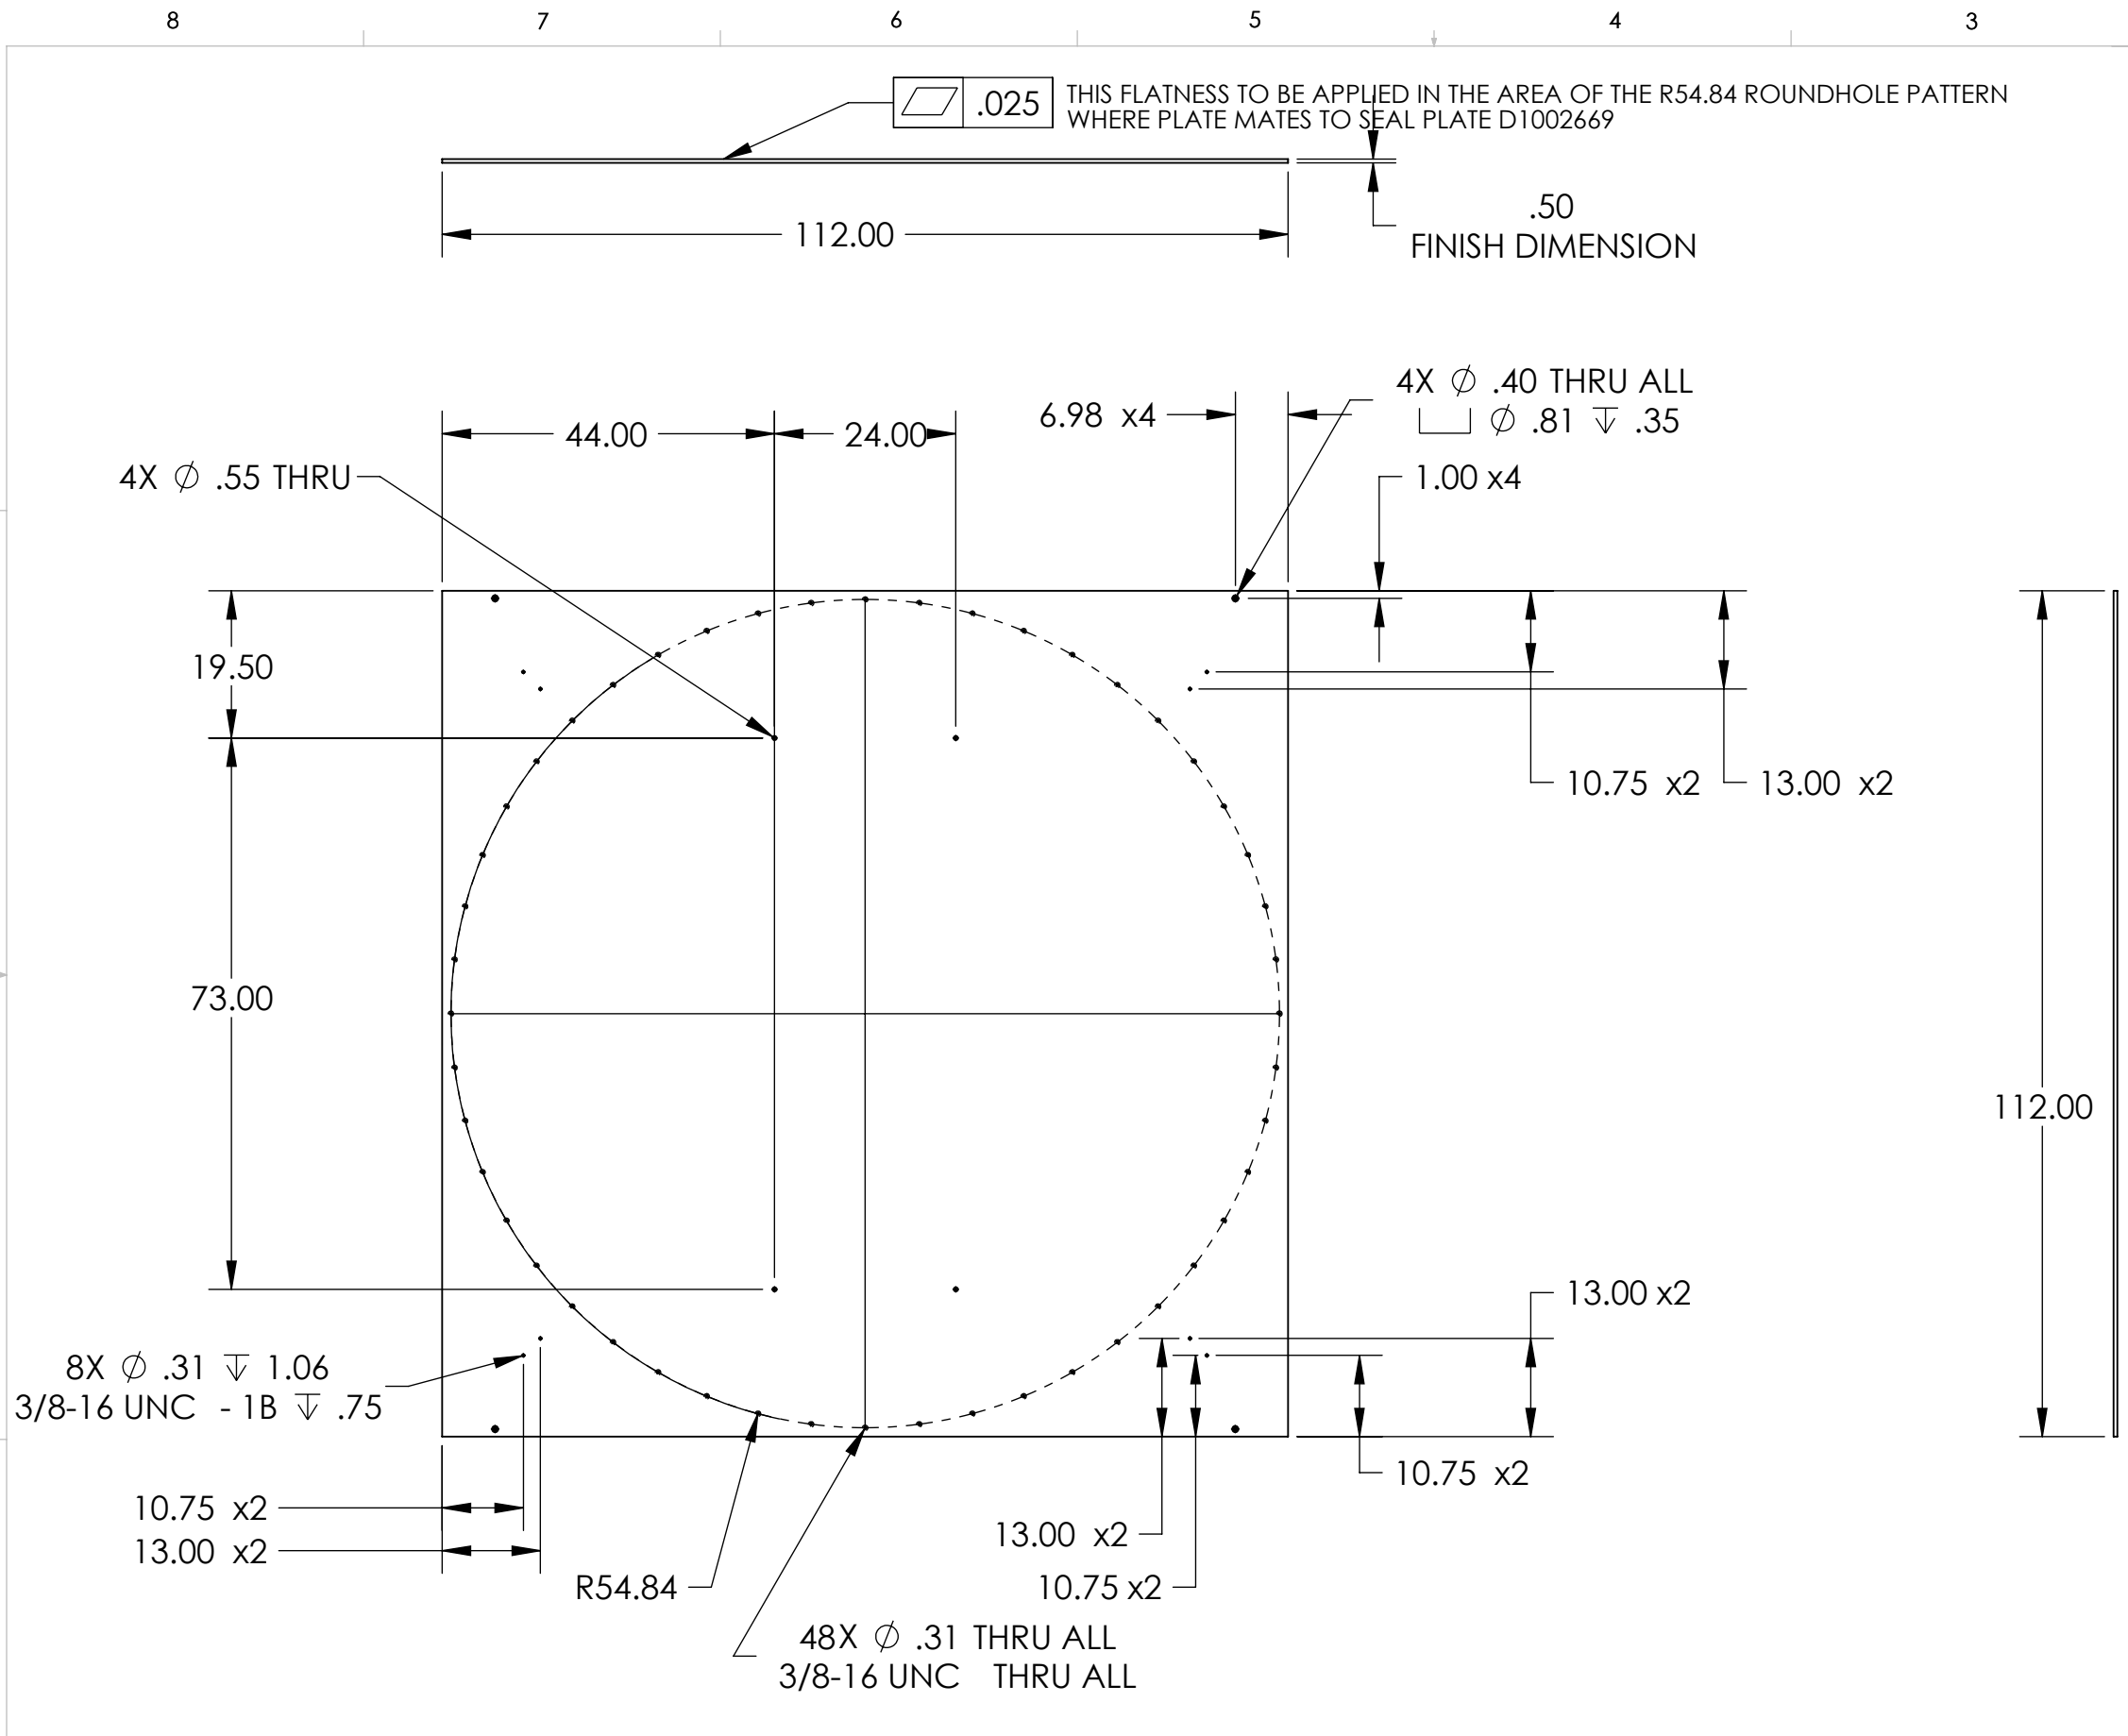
PLATE CAN BE TWO PIECES WELDED INTO ONE. TOP SURFACE MUST BE SMOOTH AND FLAT IN MOUNTING AND SEAL AREA.
